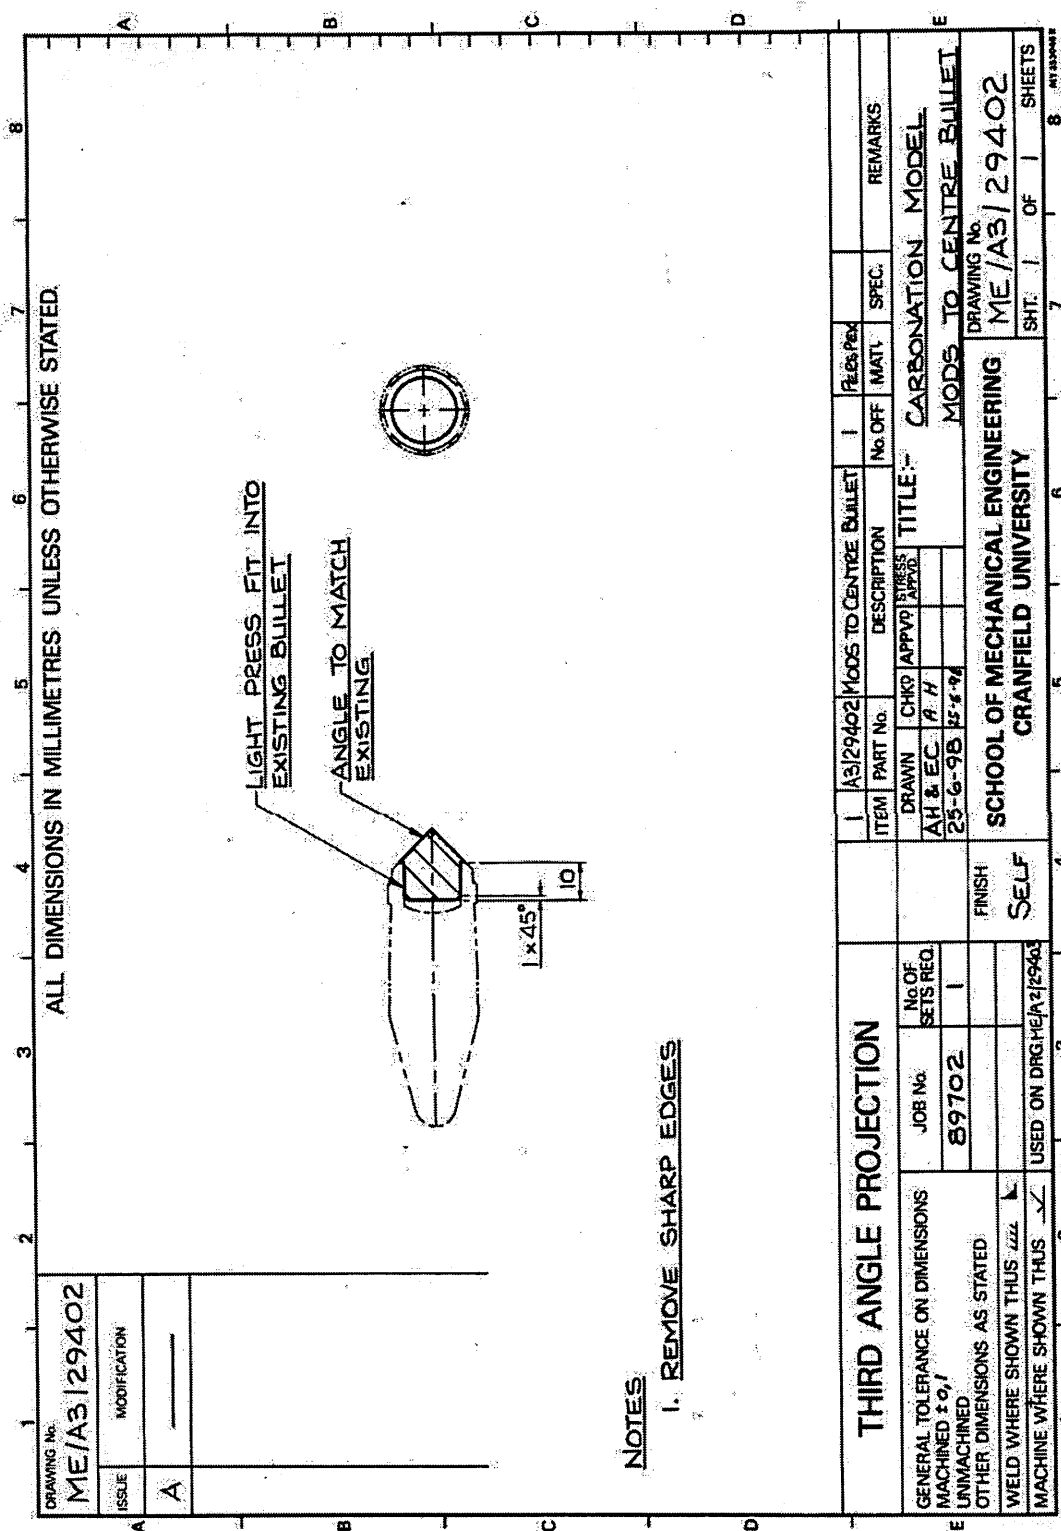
Engineering drawing of the test nozzle – modifications to the central body
